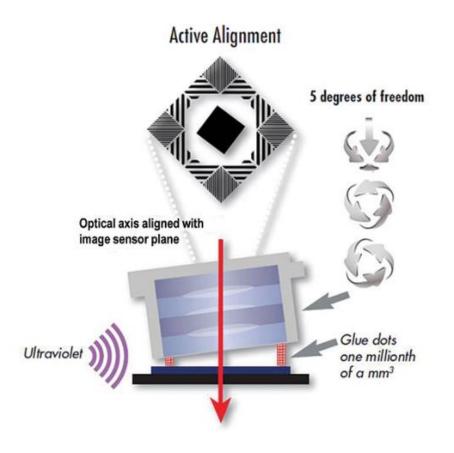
Example of Active Alignment of a lens onto an image sensor PCB [49].
